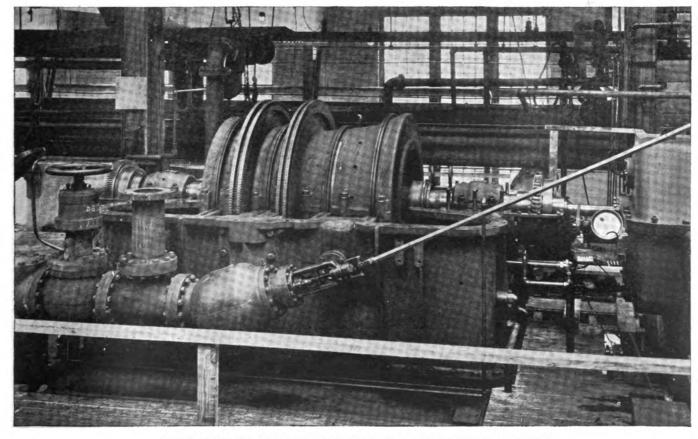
TURBINE ON TEST STAND-CYLINDER BLADE RINGS IN PLACE
